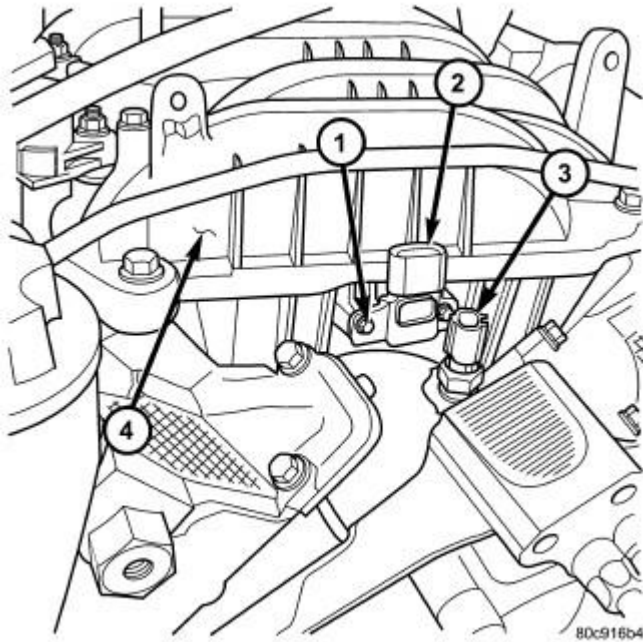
MAP Sensor, ECT Sensor, Intake Manifold & Screw
